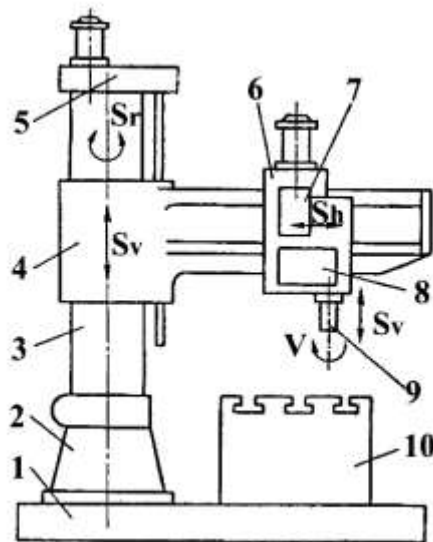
Radial drilling machine: 1 – plate; 2 – bed; 3 – rotating ( $S_r$ ) column; 4 – rotating together with column and moving up and down ( $S_v$ ) traverse; 5 – moving mechanism; 6 – spindle head, moving horizontally ( $S_h$ ); 7 – gear box of spindle head; 8 – feed mechanism; 9 – spindle; 10 – table
